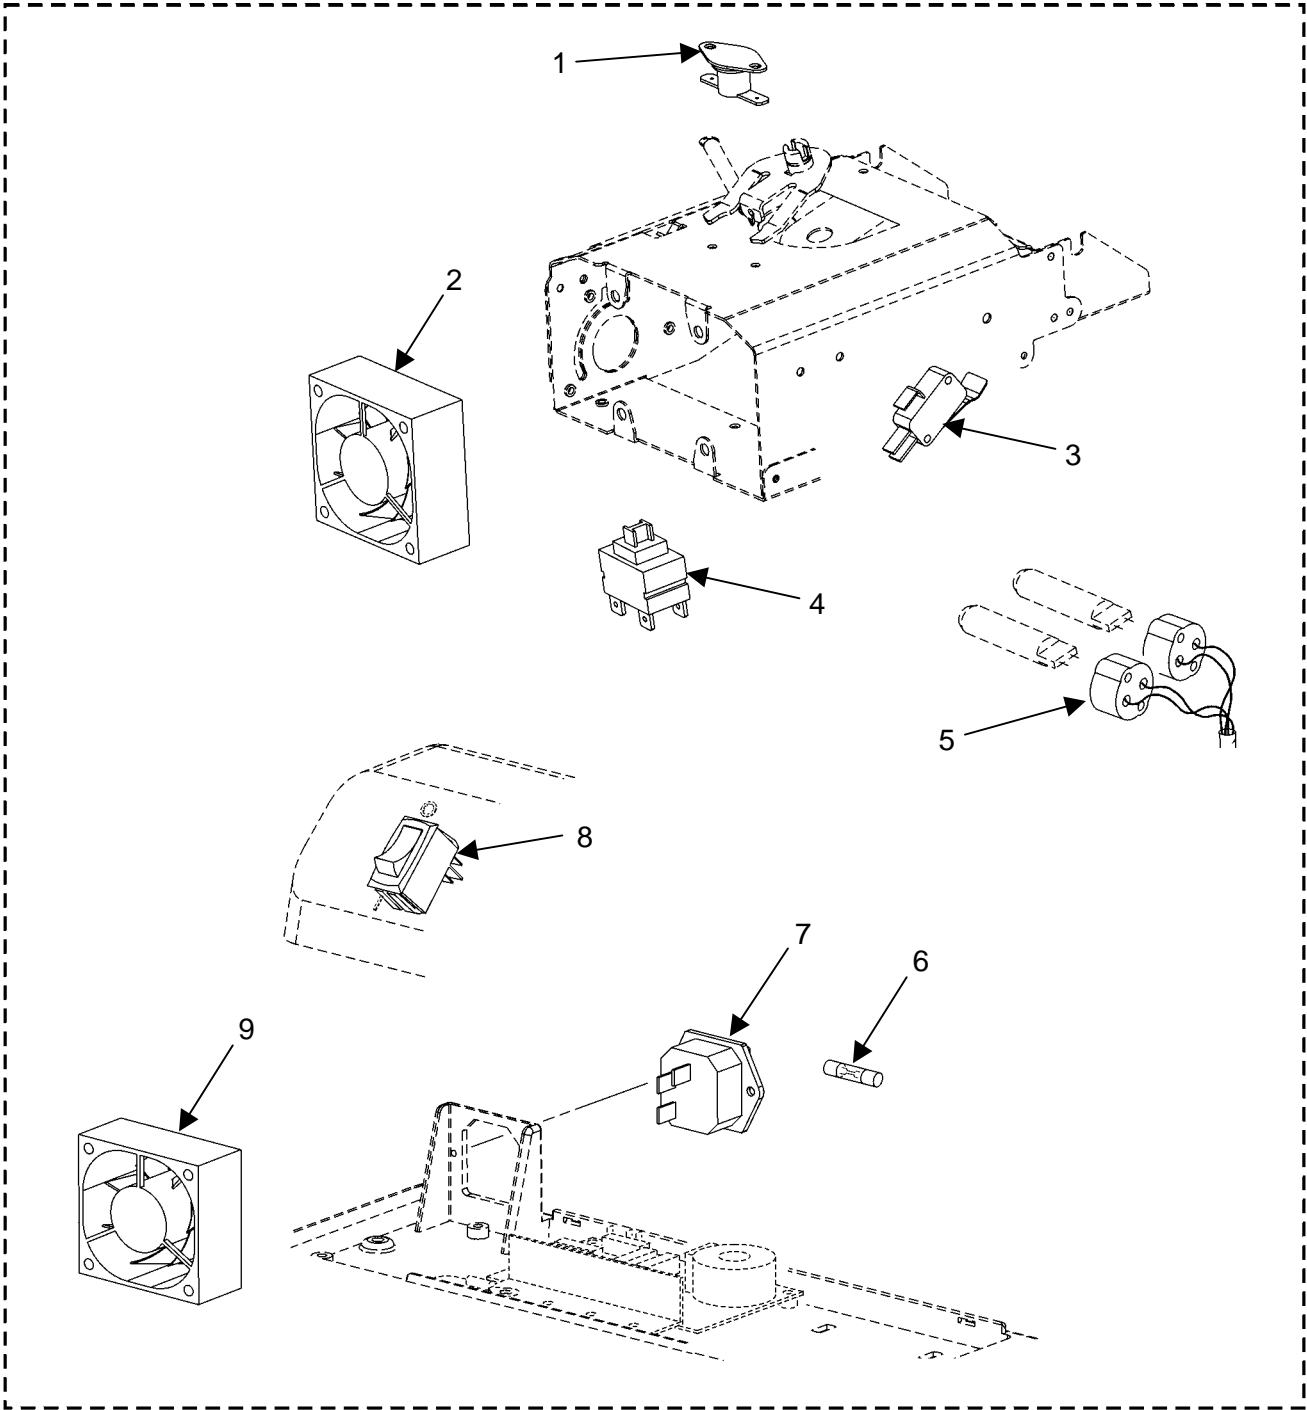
Small Electrical Parts Kit (100-127V Machines)
